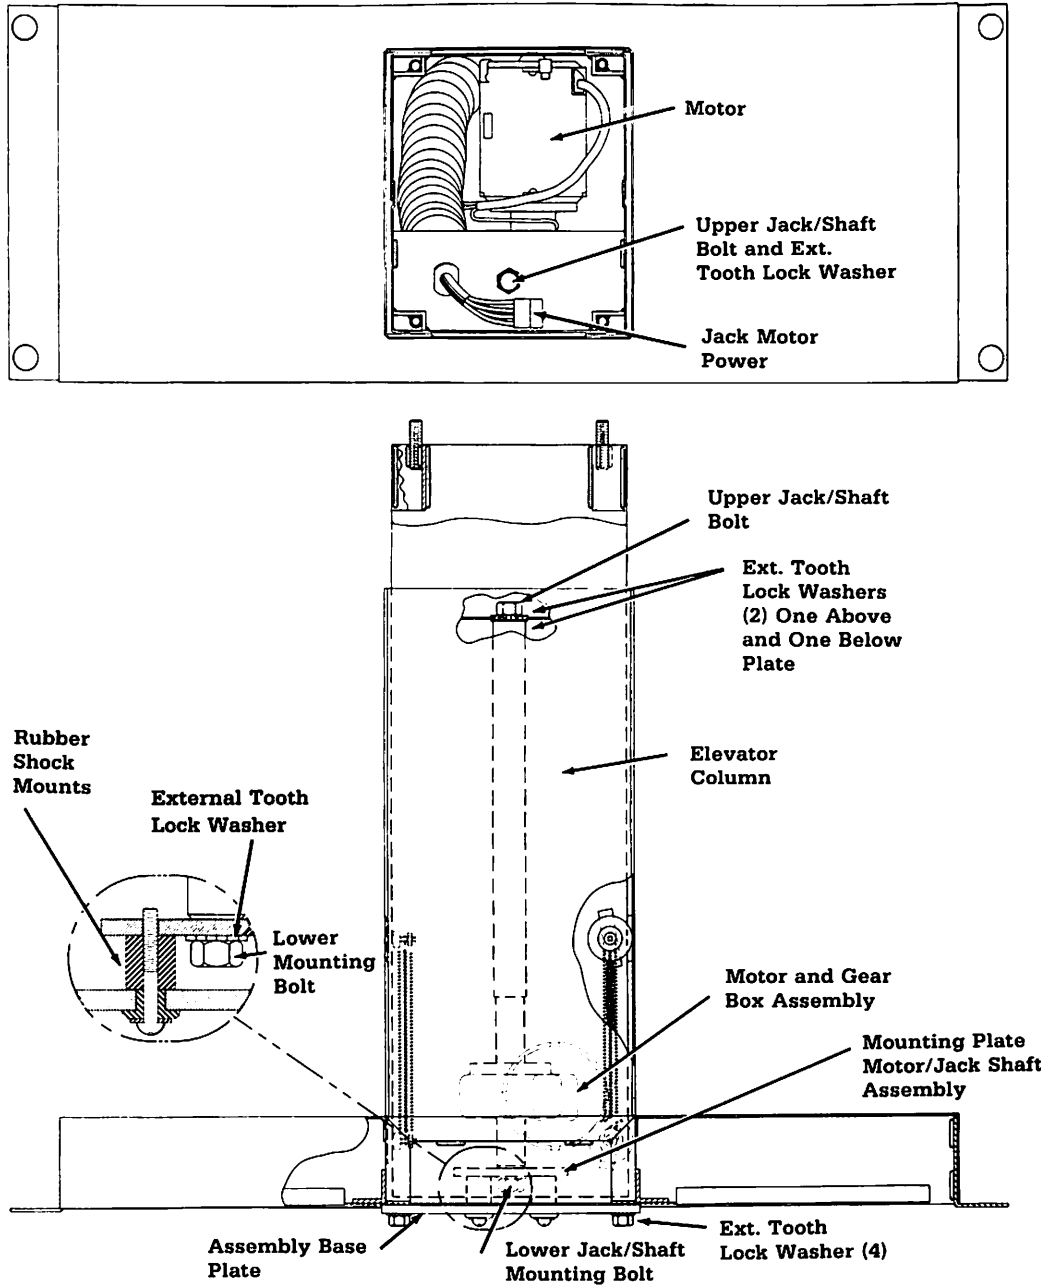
Top and Cut-away Internal Side View of Elevating System
